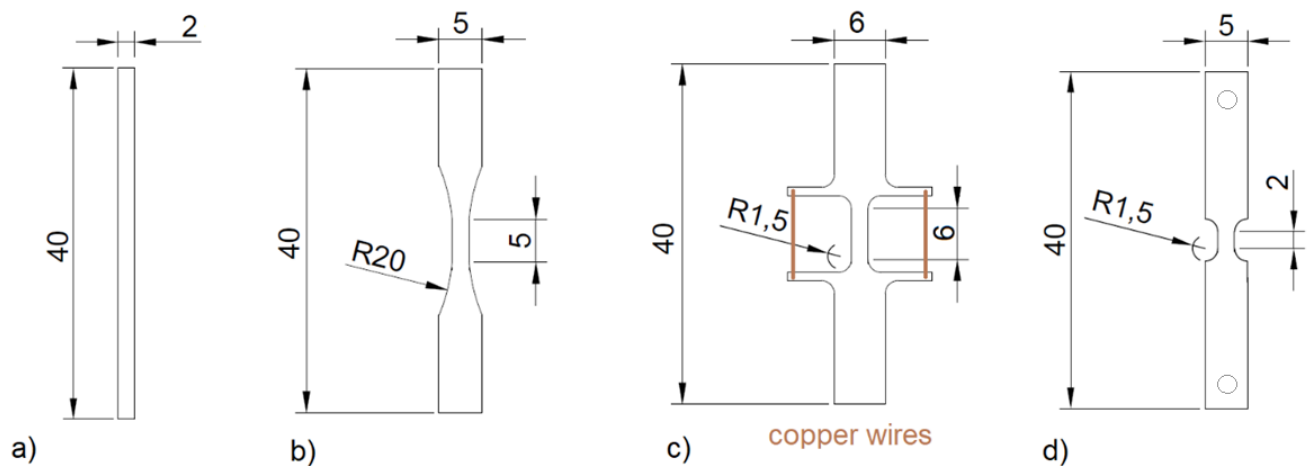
Four sample geometries investigated in this study for testing with the ETMT system, (a) rectangular, (b) dog-bone, (c) winged, and (d) short gauge length. All dimensions are in mm. Note: in (c) the coloured lines connecting the wings are schematic representation of the copper wires used to create an electric short-cut.
